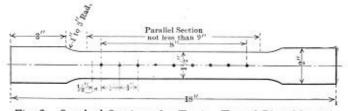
Standard Specimen for Tension Test of Plate Material
